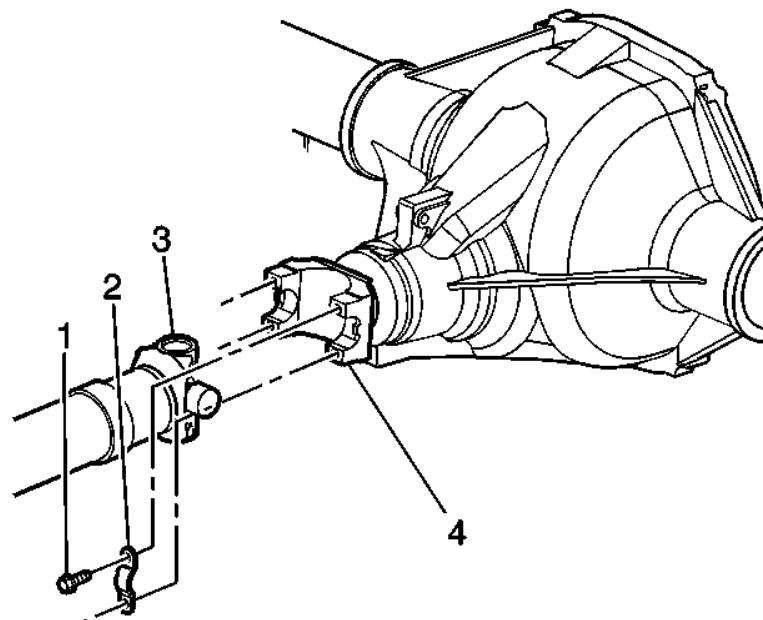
Propeller Shaft, Rear Axle Pinion Yoke, Yoke Retainers And Bolts
